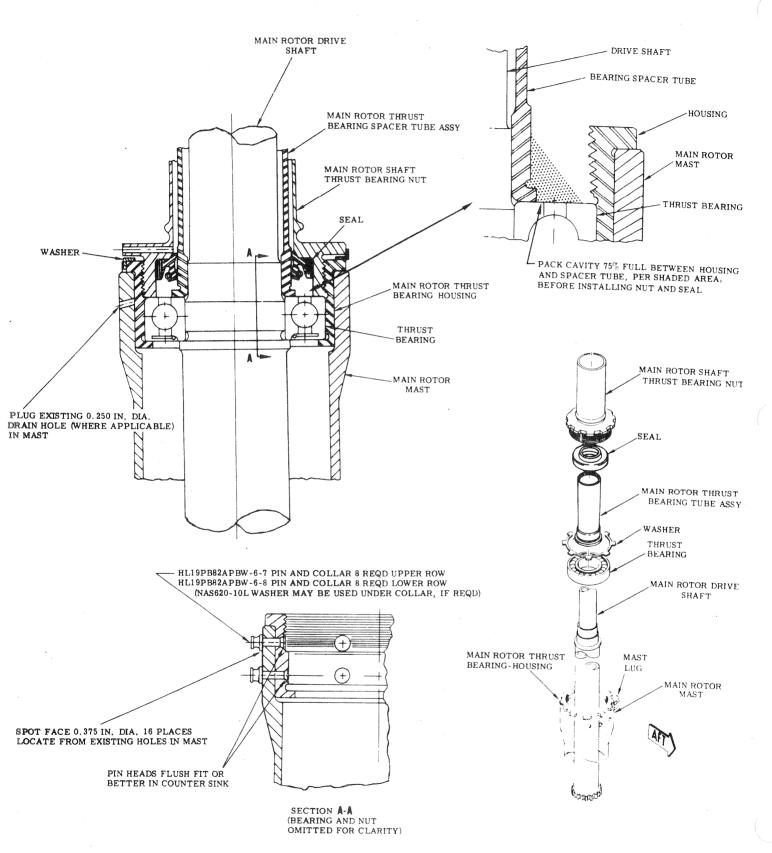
BEARING INSTALLATION-MAIN ROTOR THRUST
